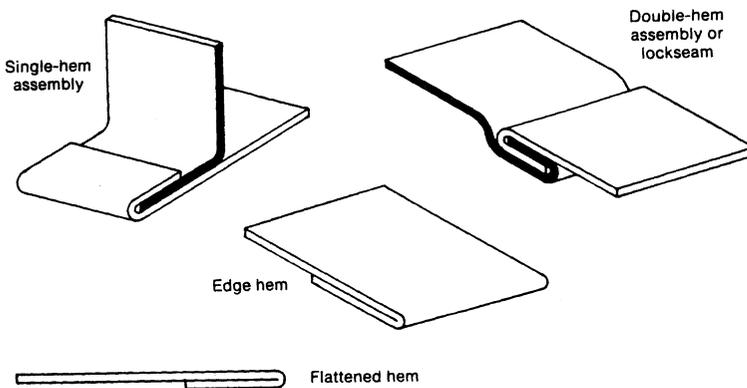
Assembly of sheet metal panels by hems and seams. (From Ref. 13.)
